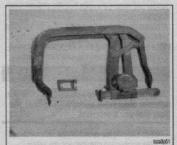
C-clamp type spring compressor and an OHC spring removal tool (center) for cup type followers
